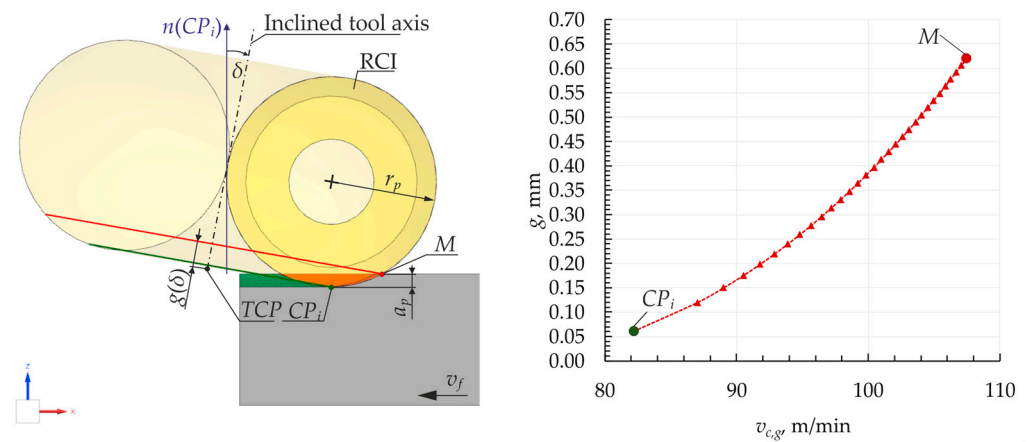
Cutting speed variation along the tool axis for torus milling cutter (tool diameter: 16 mm; round cutting insert radius: 4 mm; spindle speed: 2786 rpm; inclination angle: 10°).
